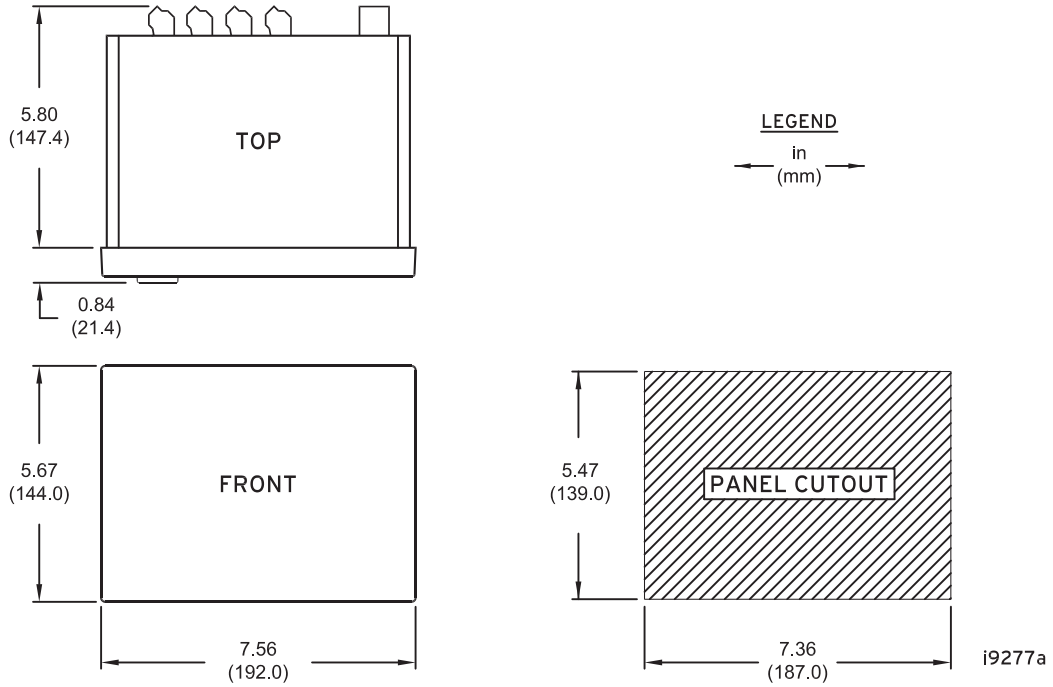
SEL-735 Horizontal Panel-Mount Dimensions
